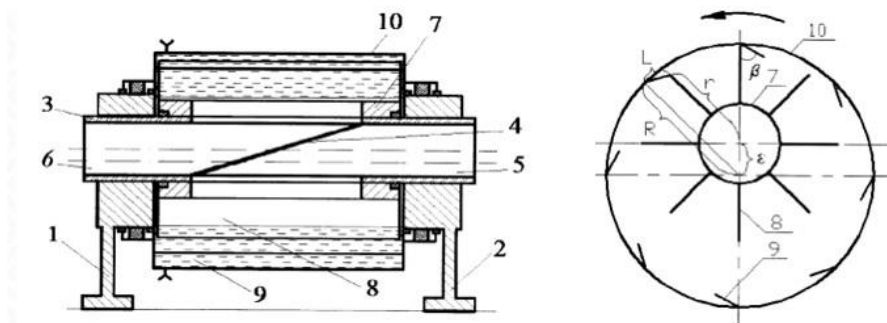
Machine with rotating casing: 1, 2 – fixed end covers, 3 – fixed distribution shaft, 4 – baffle plate, 5, 6 – inlet and outlet pipes, 7 – impeller, 8 – impeller blades, 9 – rigidly fixed casing blades, 10 – casing
